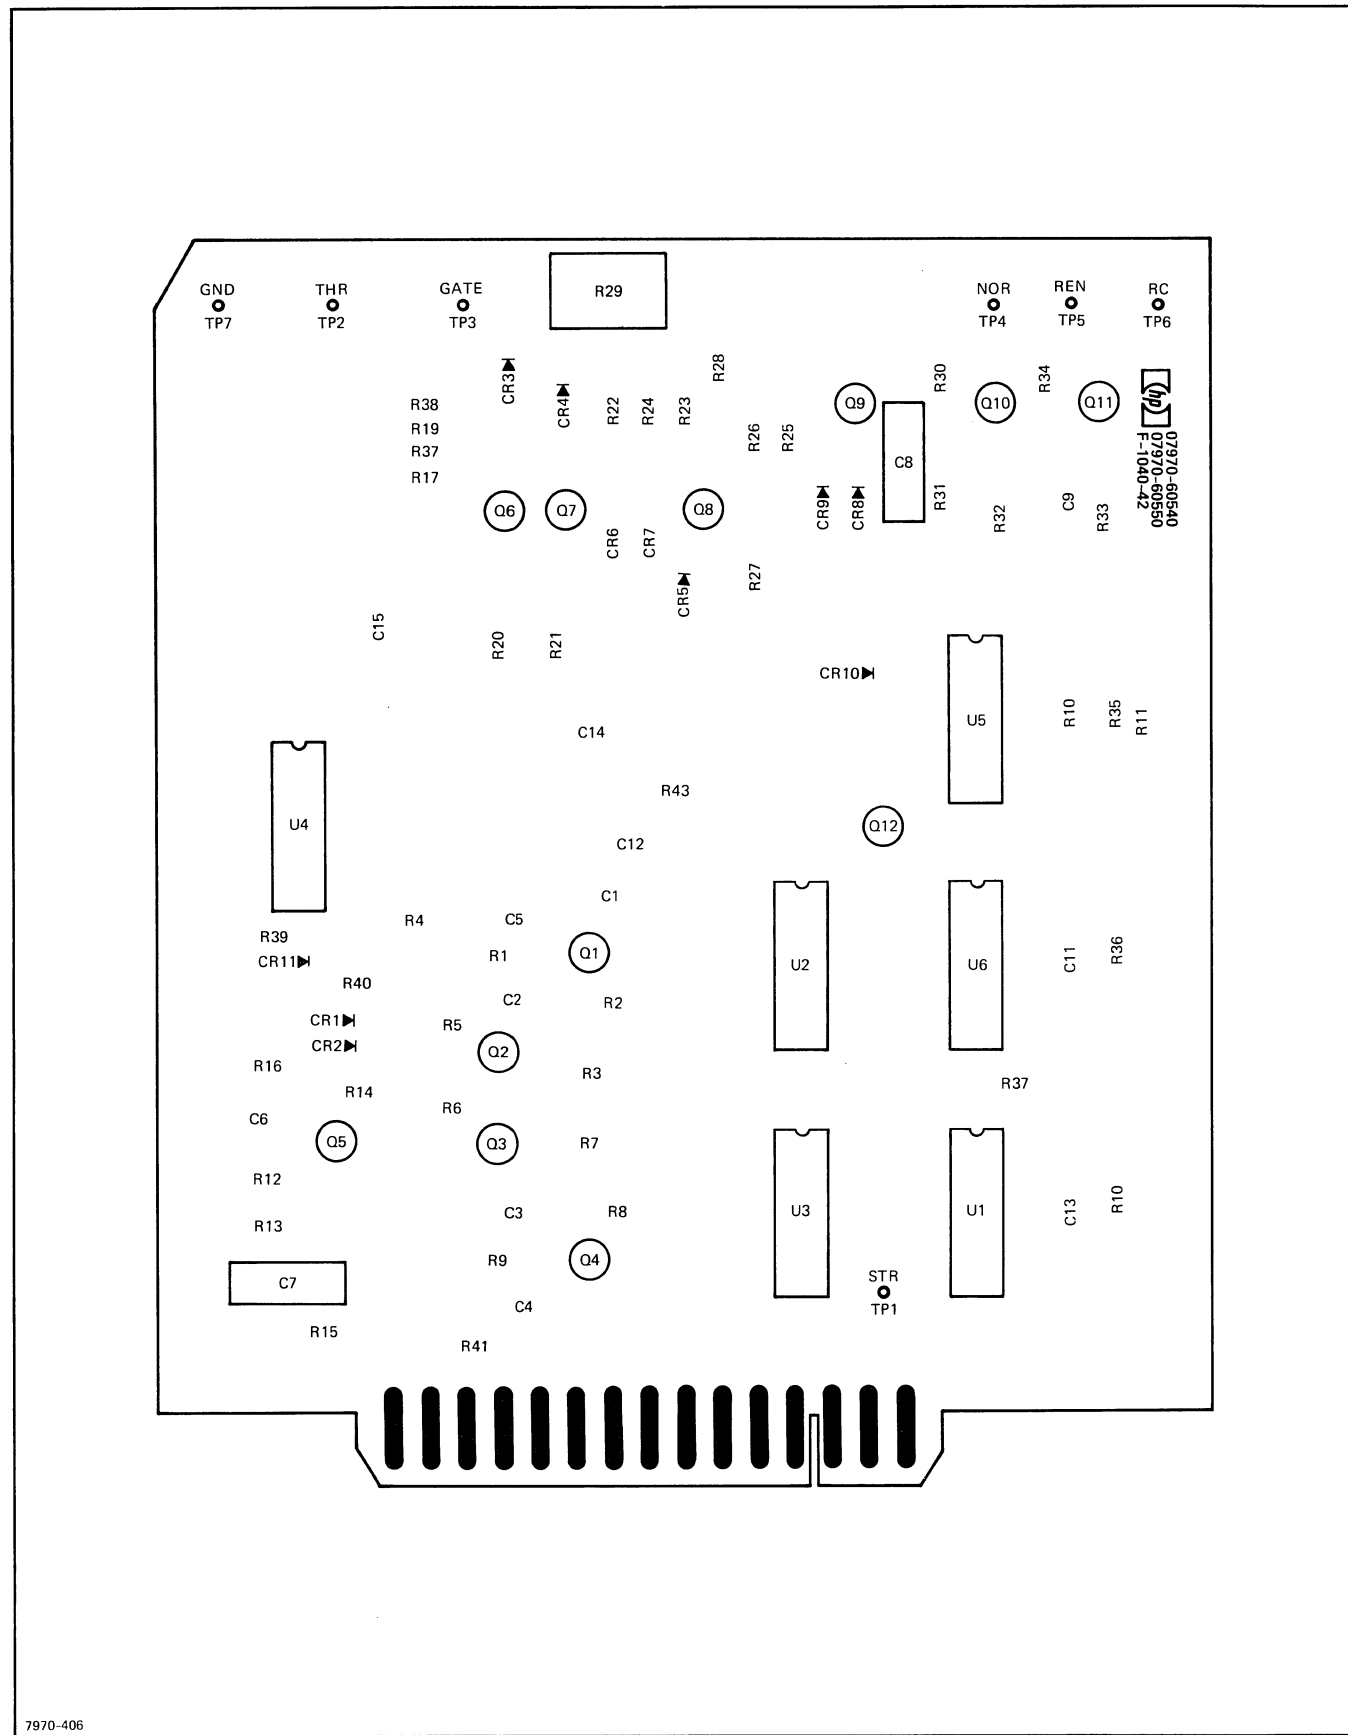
Read Control PC Assembly A18A1, Parts Location Diagram
